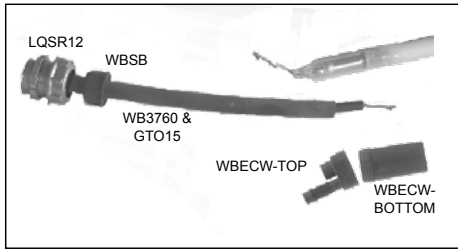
Slide WBSB over WB3760 and GTO cable until you reach metallic bushing of LQSR12
